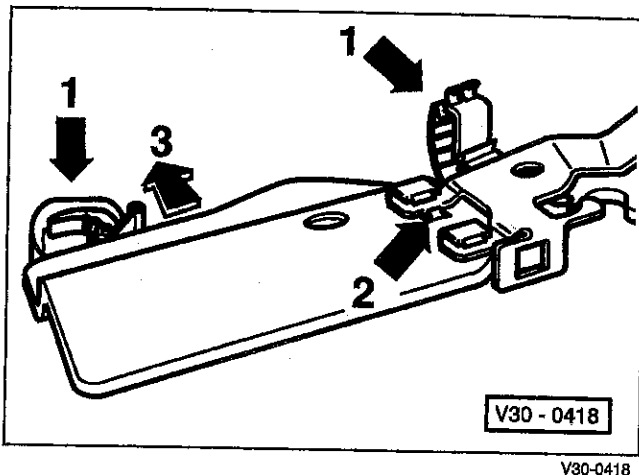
Relay panel guard plate. Remove wiring from retainers (1), press detent (2) toward pedal cluster and then press guard plate up toward instrument panel to remove (3).
